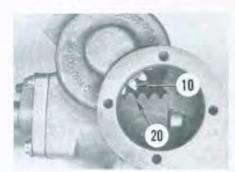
The marked (3rd) tooth of the left pinion gear (10) should be aligned with the center valley of rack (20).
